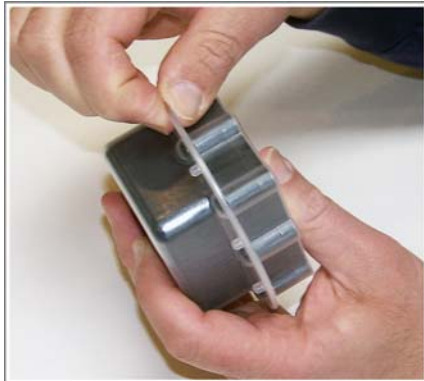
, 3.6 – Pinching the Shell Edges Together to Seat the Pins.
